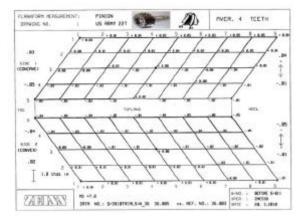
TTO Bevel Pinion A518-00011 Flank Form Analysis After Initial MMP Treatment
